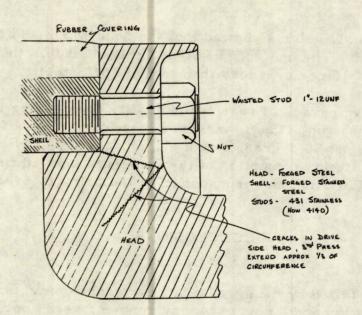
Cross-Section of the Head: Shell Joint (courtesy of M.B. and P.R.). Note: A blind crack, as indicated on the drawing, was not found to exist.
